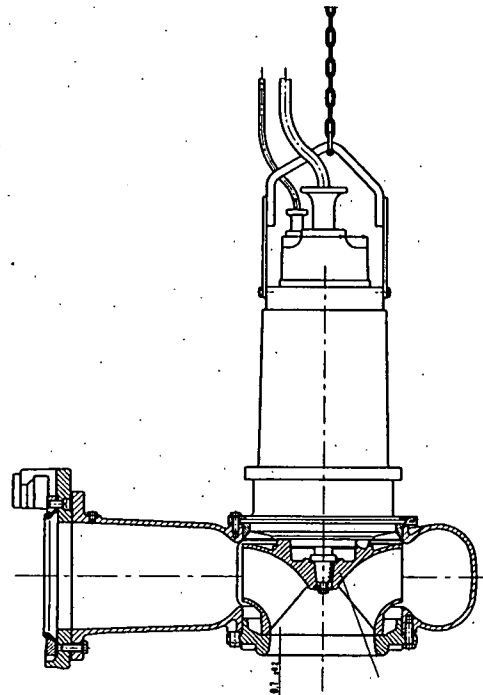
Section of single-channel pump showing impeller clearance at suction opening.
